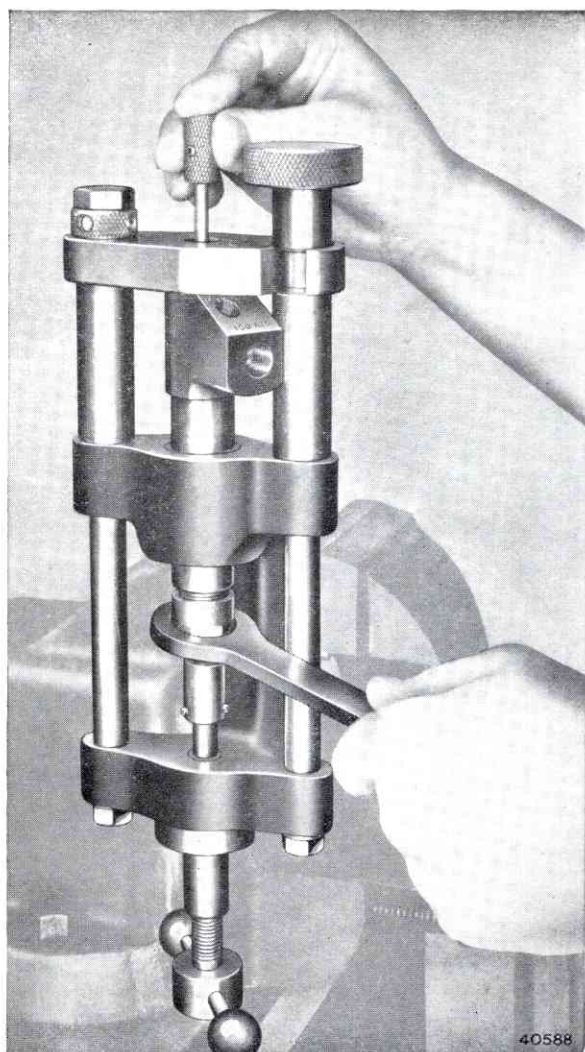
TIGHTENING THE NOZZLE CLAMP NUT AFTER CENTRALISING THE NEEDLE VALVE
